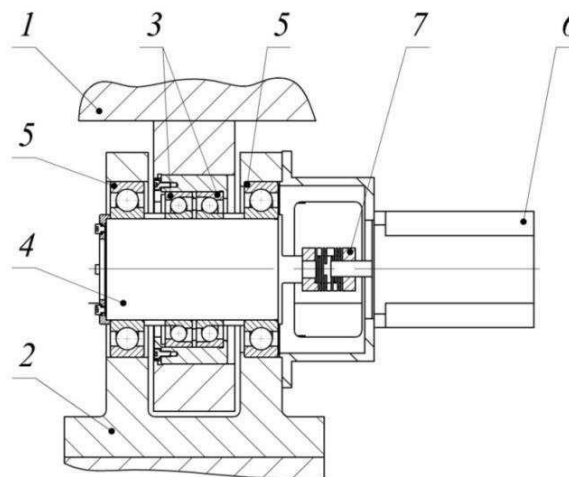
Schematic design of the support with friction compensation (3 - support bearings, 4 - intermediate shaft, 6 - electric motor)
